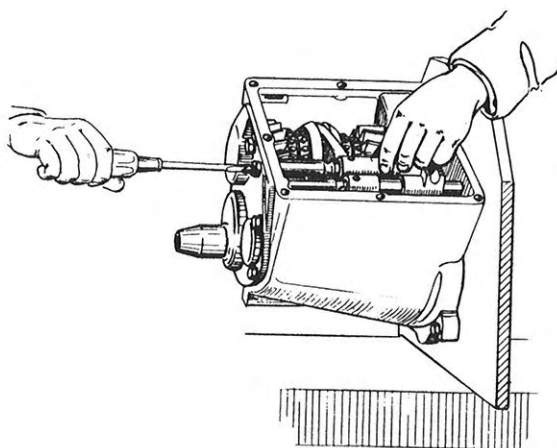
Adjustment of gear shift bar for 2nd and 3rd speeds
